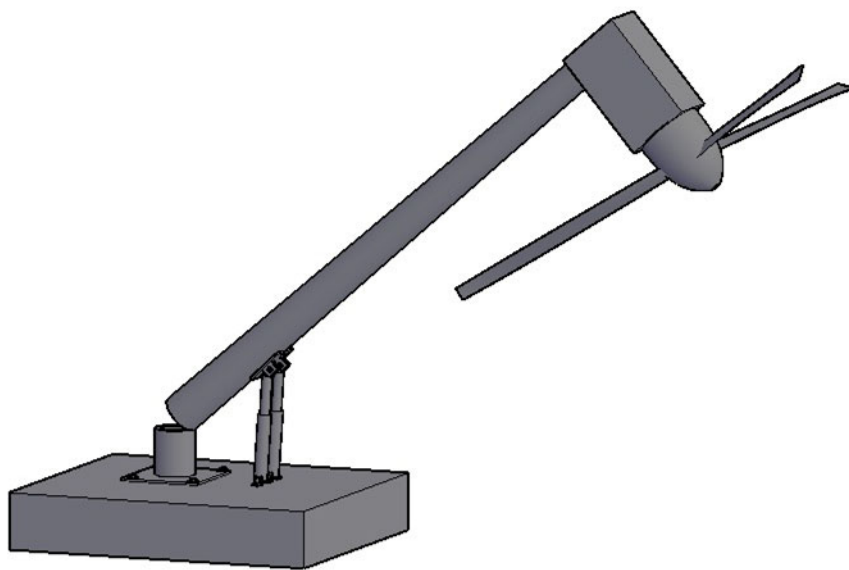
3D Model of hydraulic erection system at an angle with horizontal
